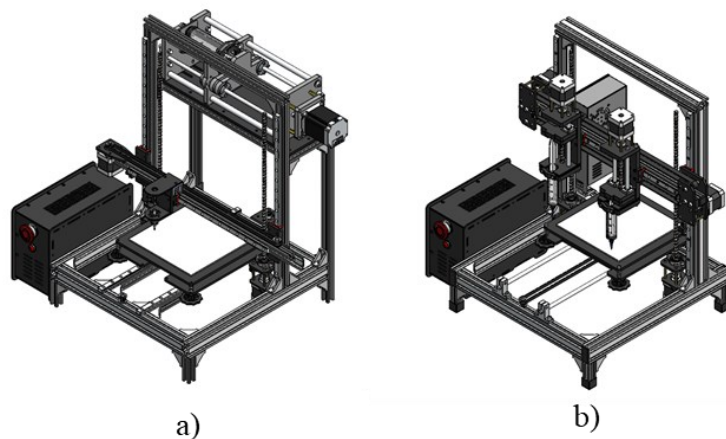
Designed of the 3D printer with. (a) Indirect extrusion; (b) direct extrusion.
